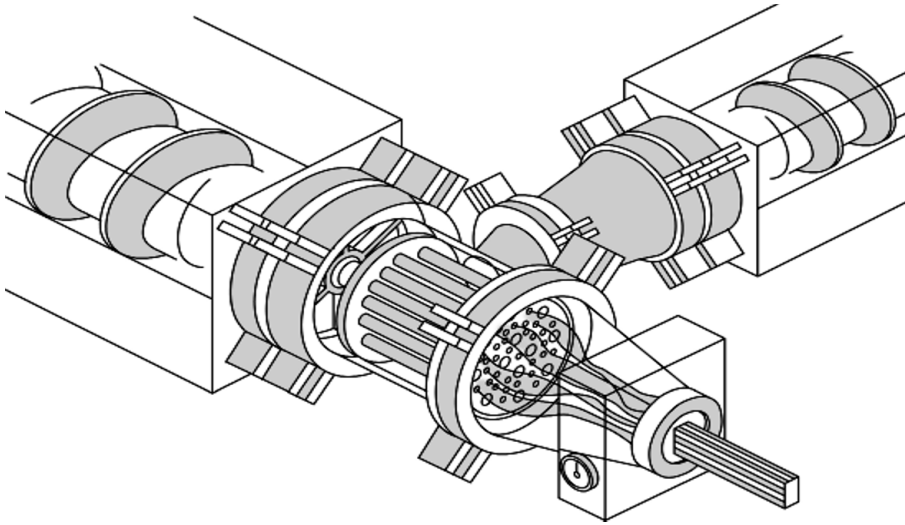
Solid–solid co-extrusion assembly for stripping.
